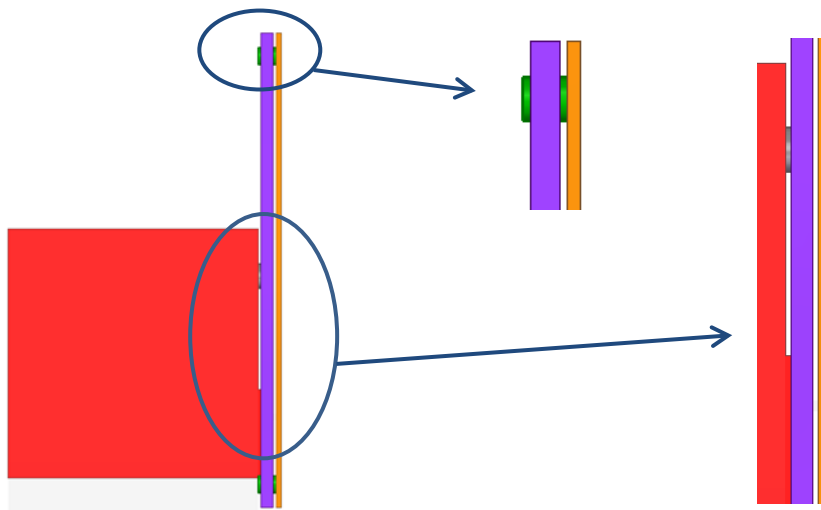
Separators between the thin and the thick plate. Glue and screw between the sensor block and the thick plate
